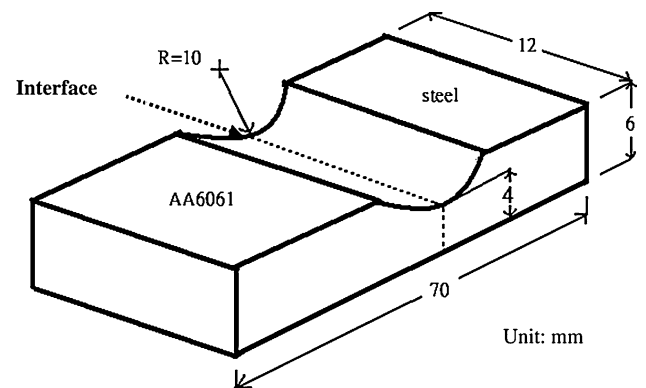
C-notch tensile specimens dimension along the vertical direction of the welding line
